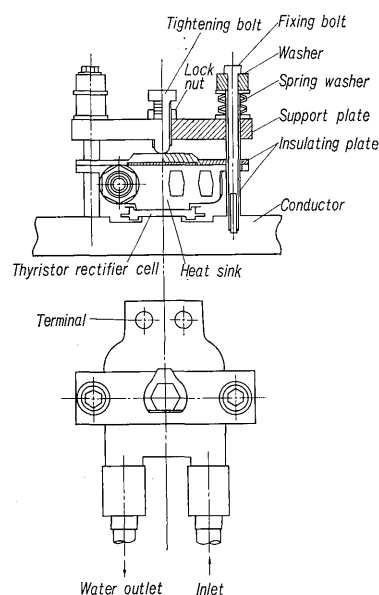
Water cooled type rectifier using flat-packaged thyristor rectifier cell
